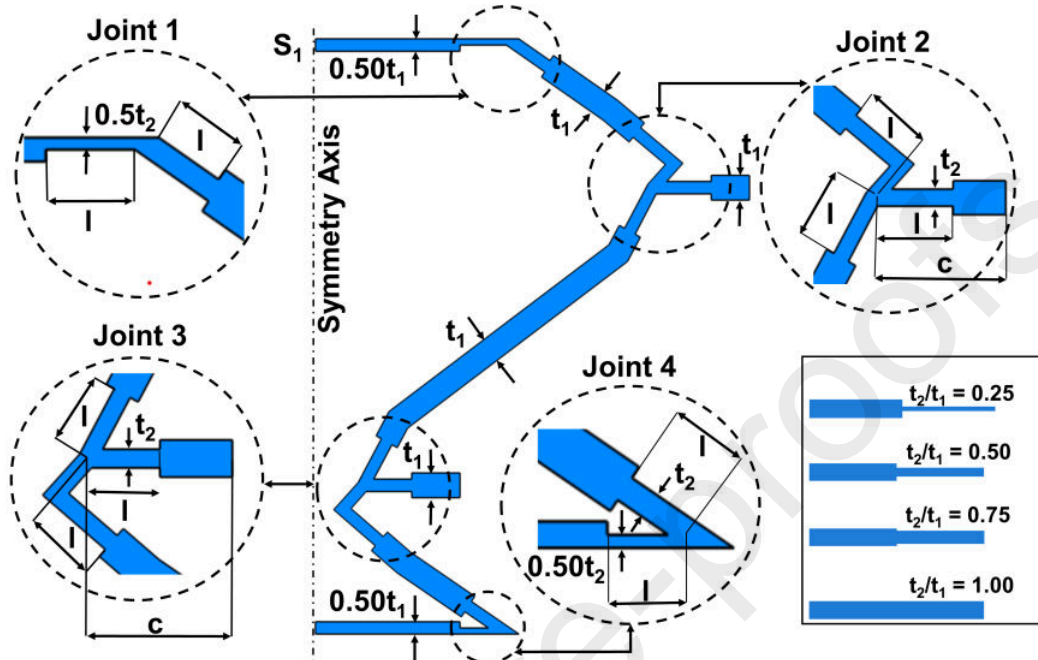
Geometric definitions describing the dimension of the shape optimised Fish-Cells ZPR joints.
